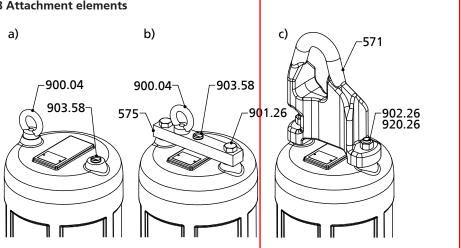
Attachment elements a) bolt for guide cable arrangement b) bolt for guide rail arrangement c) bail
